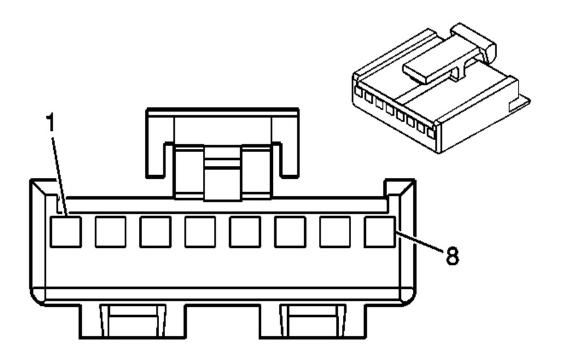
Steering Wheel Position Sensor (JL4) Connector End View Courtesy of GENERAL MOTORS CORP.
